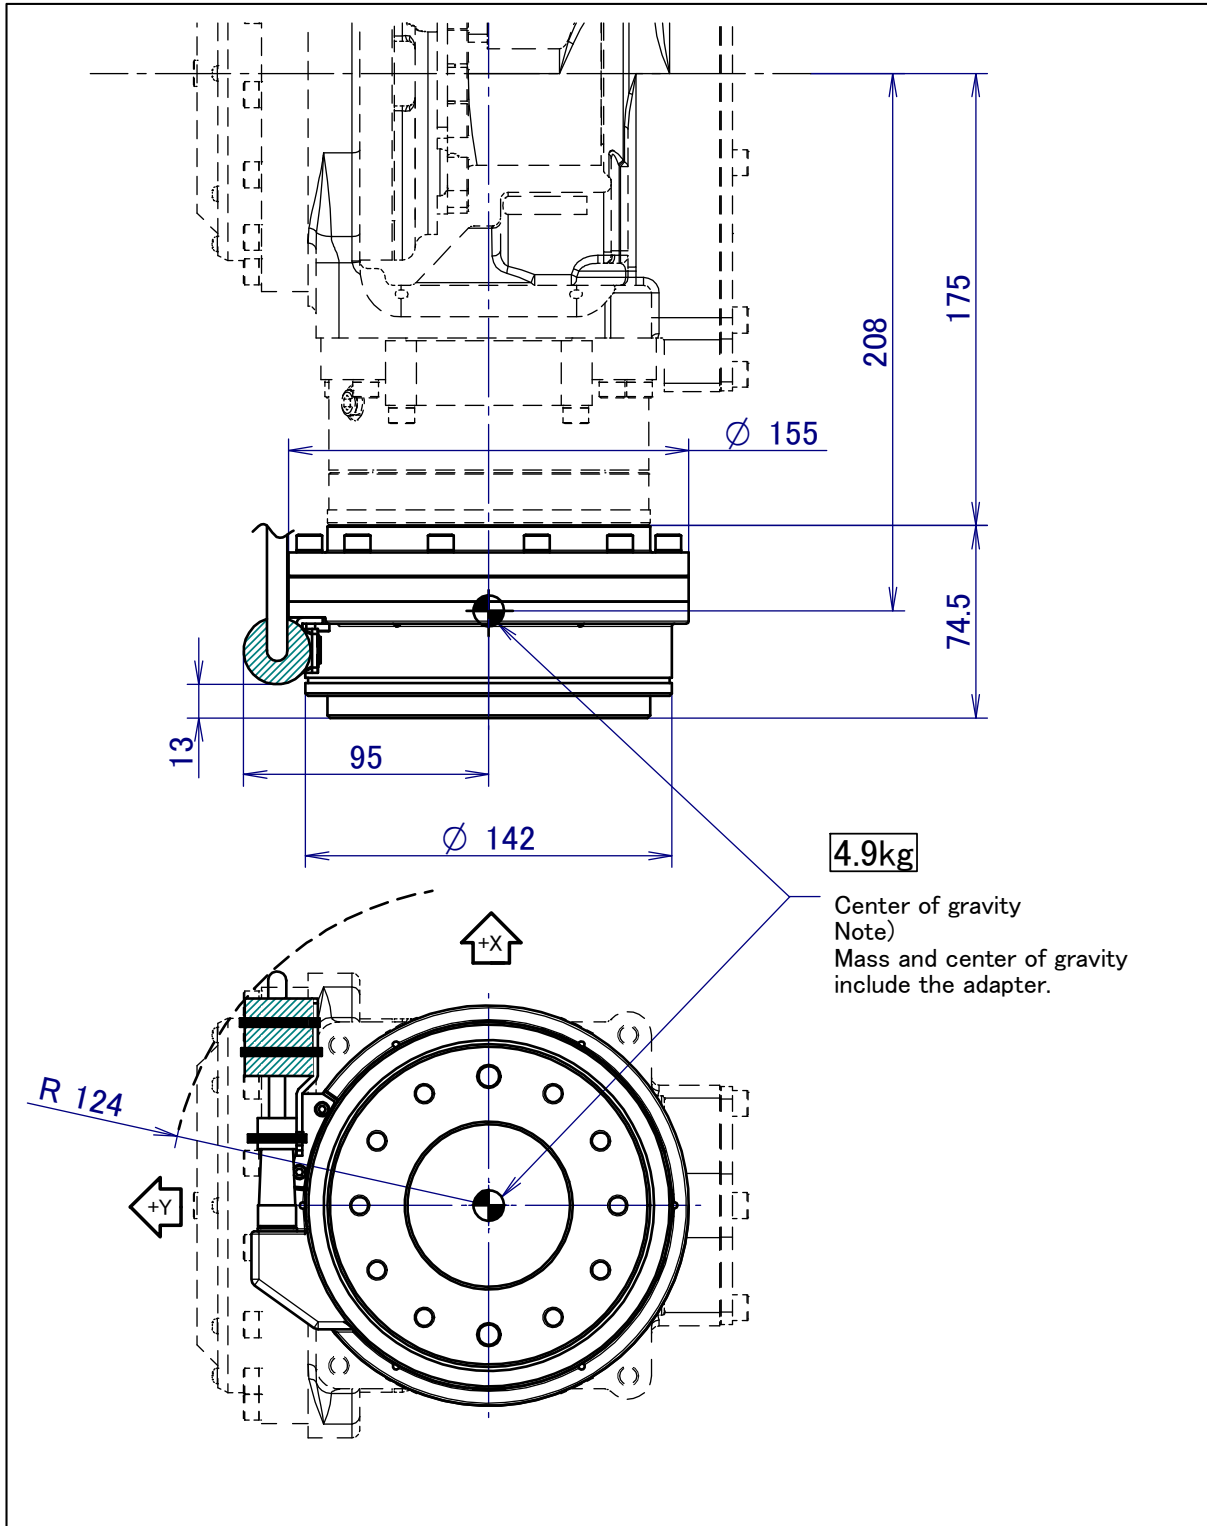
(e) External dimensions of the force sensor head
